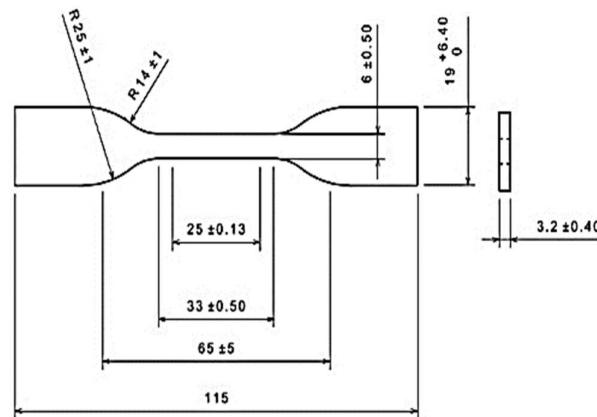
Specimen Dimensions(mm) conform D638-14 [7]
